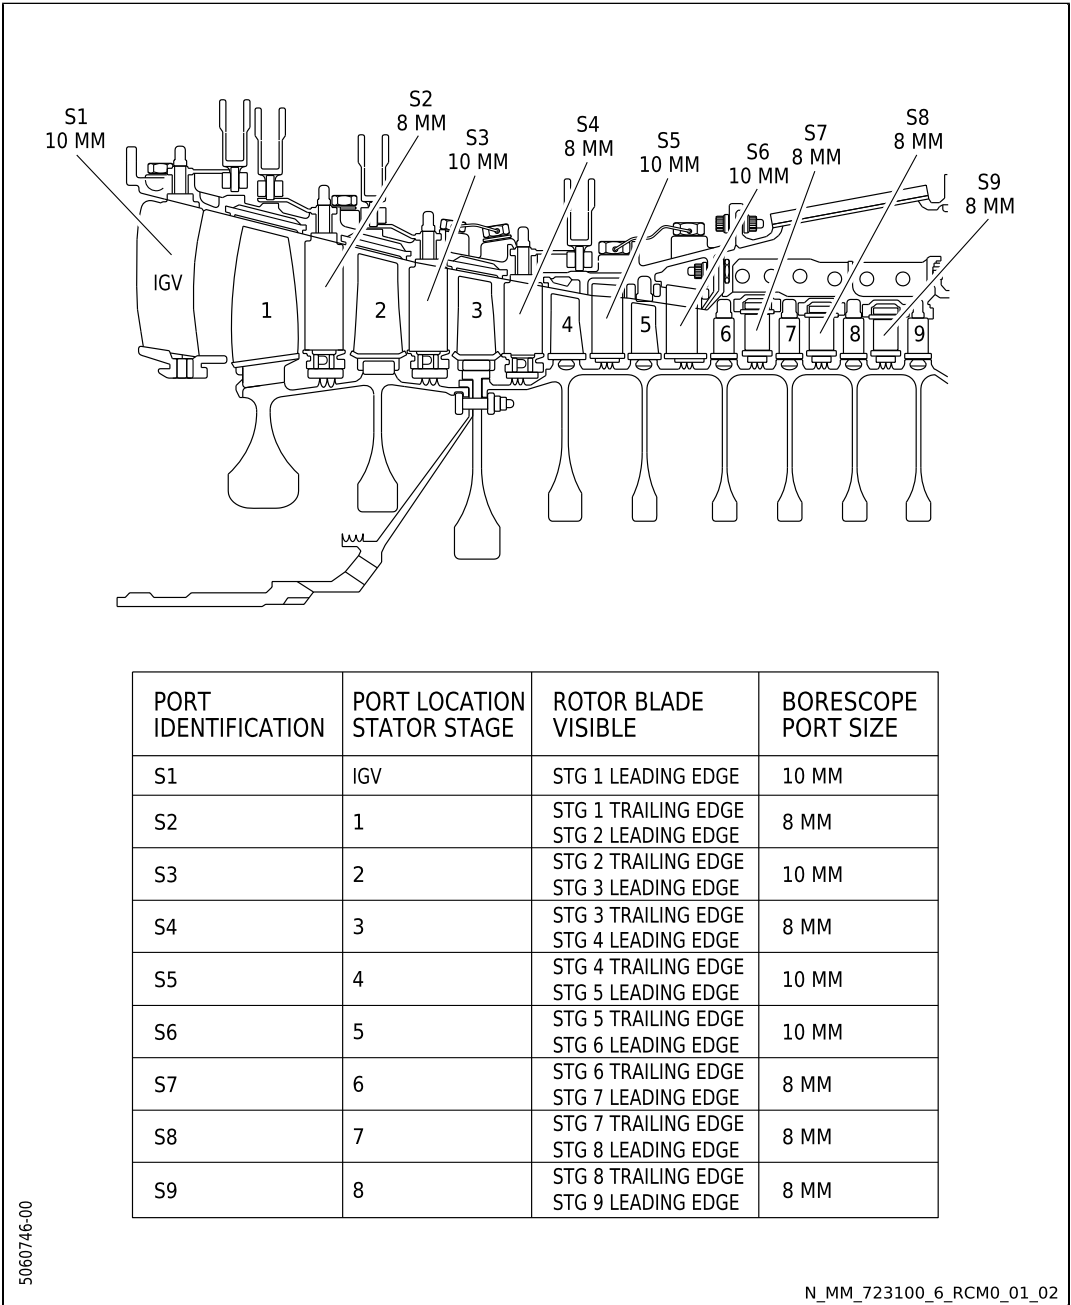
A (SHEET 1) - Borescope Ports of the High-Pressure Compressor
